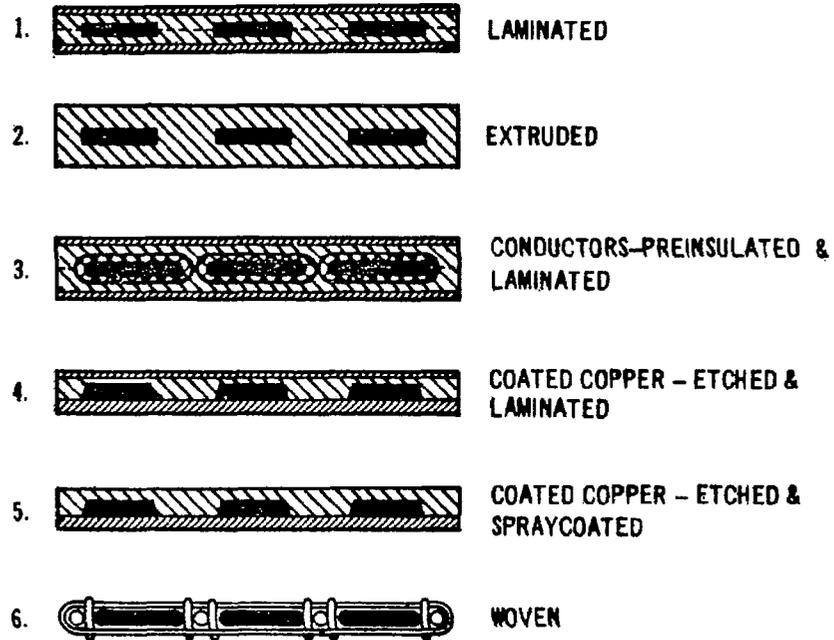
FCC cross-sections for various manufacturing methods.
